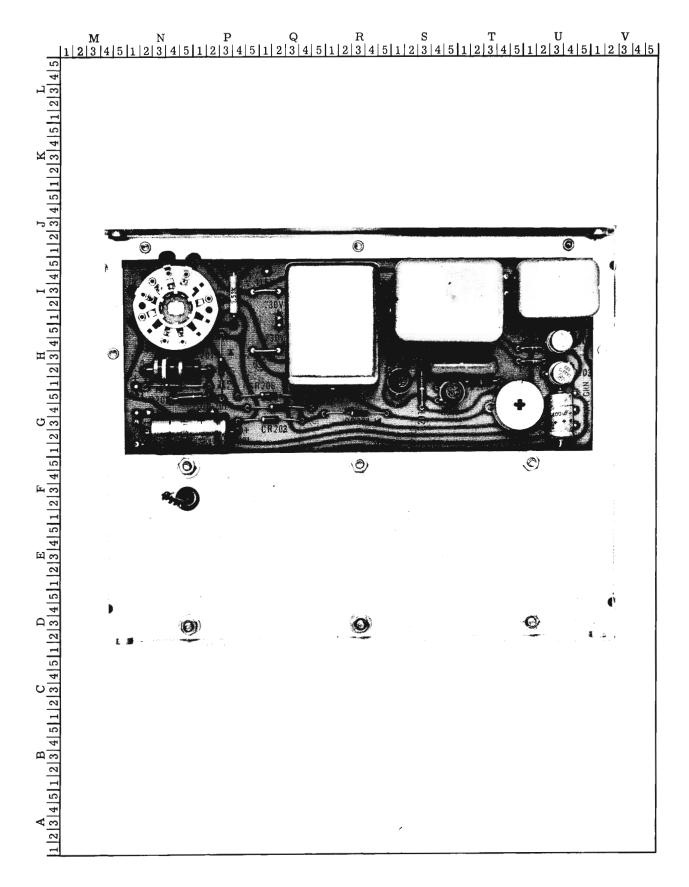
POWER SUPPLY P/C ASSEMBLY
